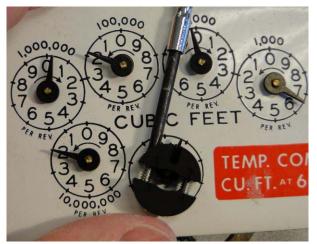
12. Thread Screws into Bottom Wheel Half
